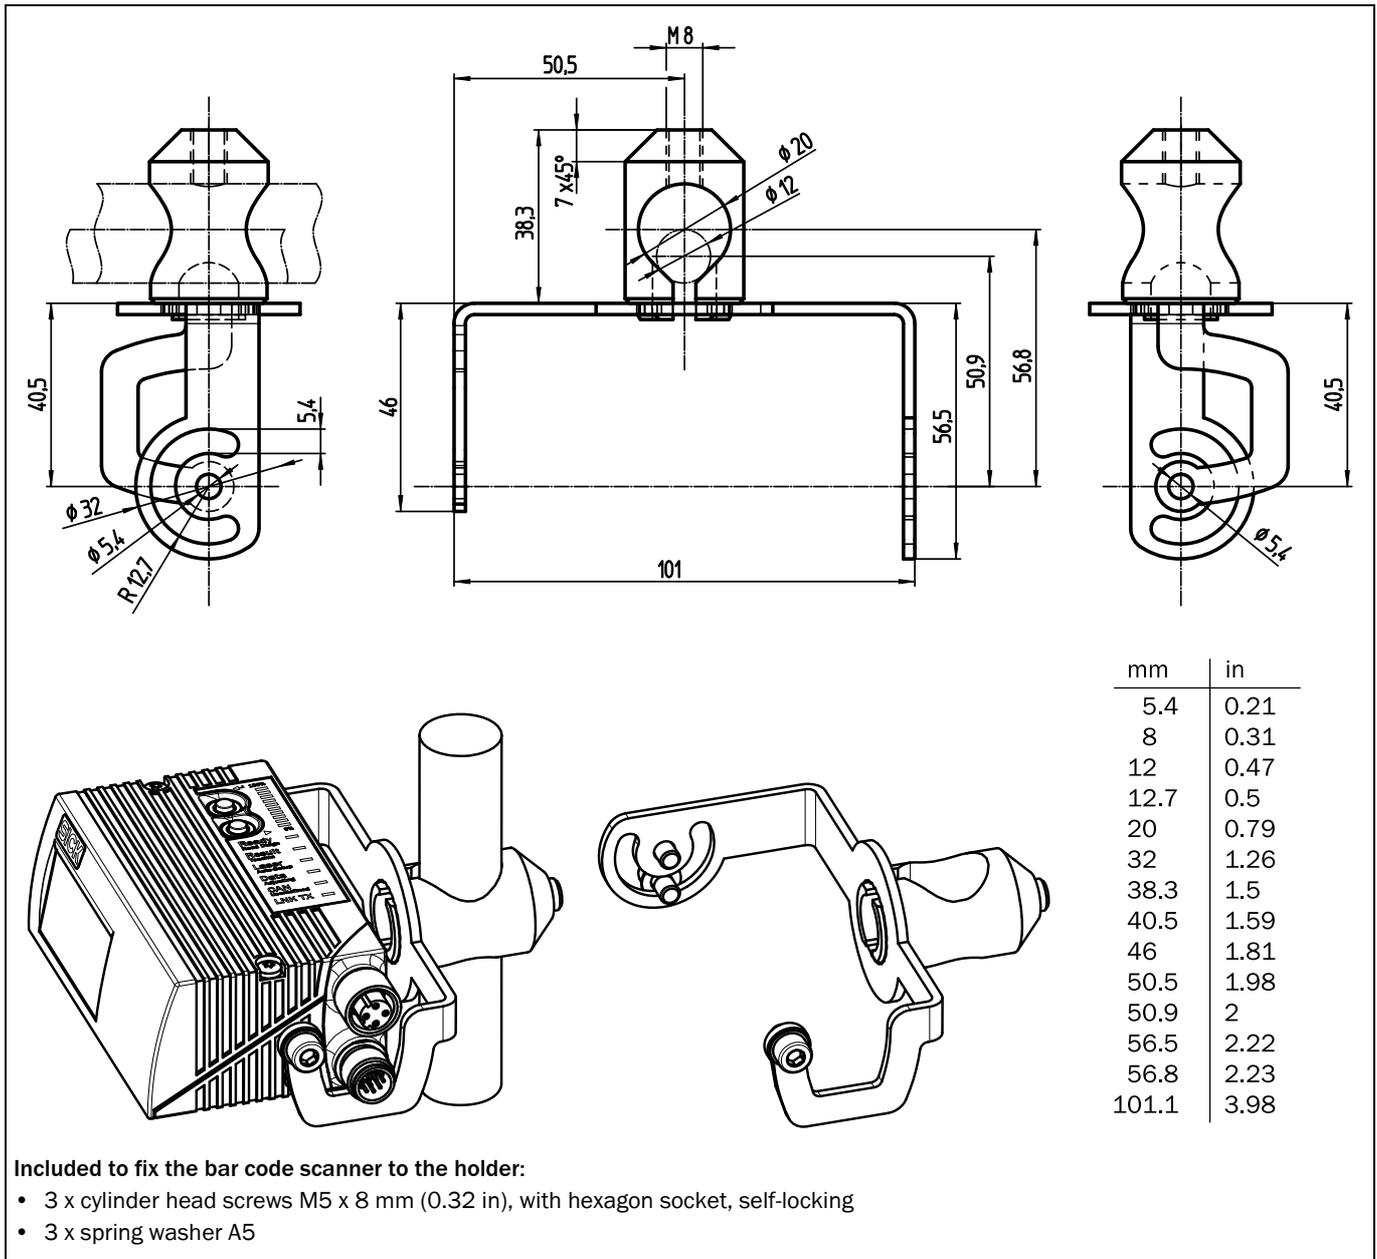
Dimensions of the round rod holder no. 2042801
